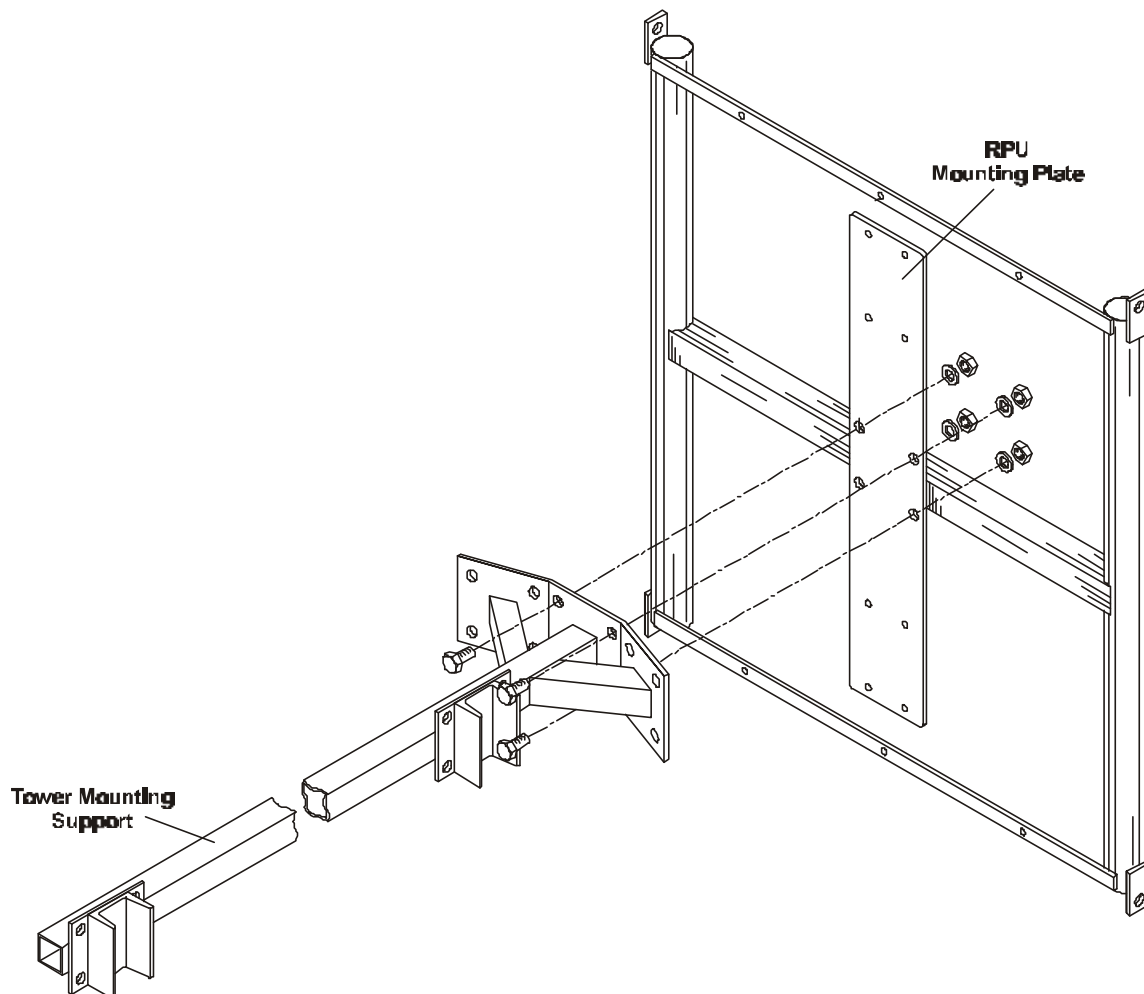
Typical Wide H-Support for Tower Mounting, Option 1, General View
